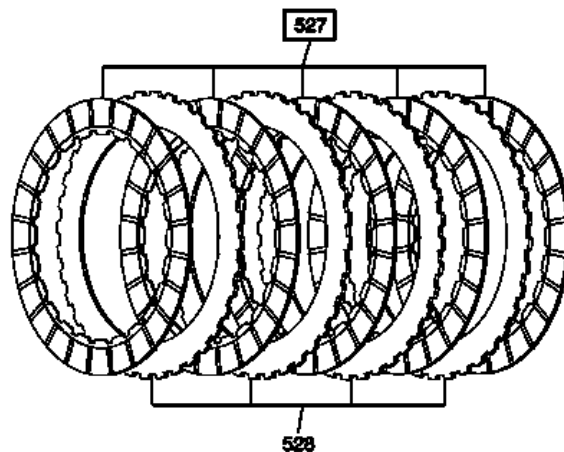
4-5-6 Plate Assembly (Gen 2) 24260700
